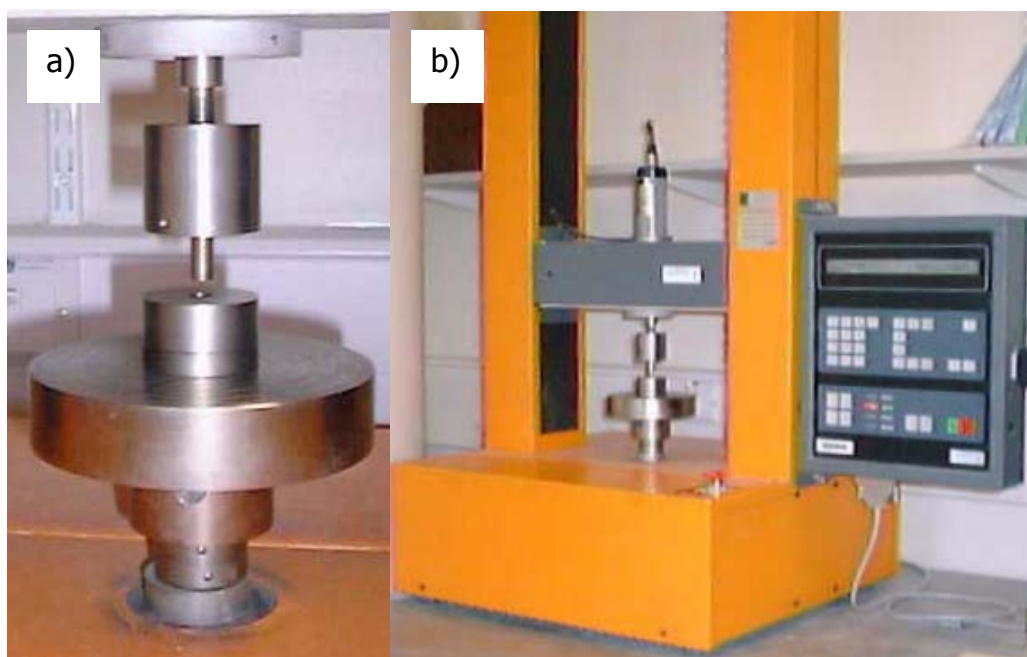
a) Punch and die, b) Lloyd universal testing machine.
